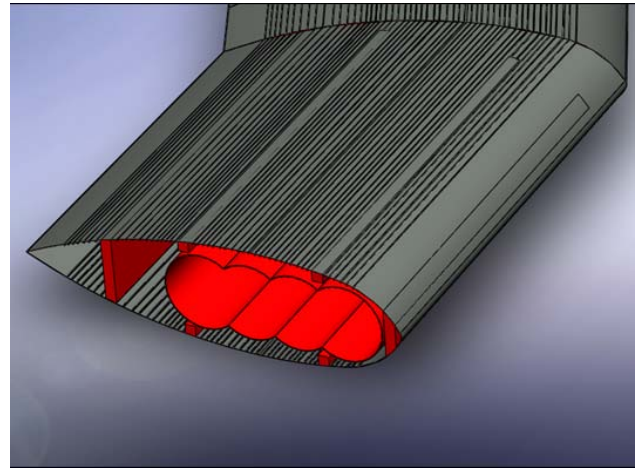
Section through centreboard detailing the multi-bubble structure - pressure and vertical bulkheads not shown.
